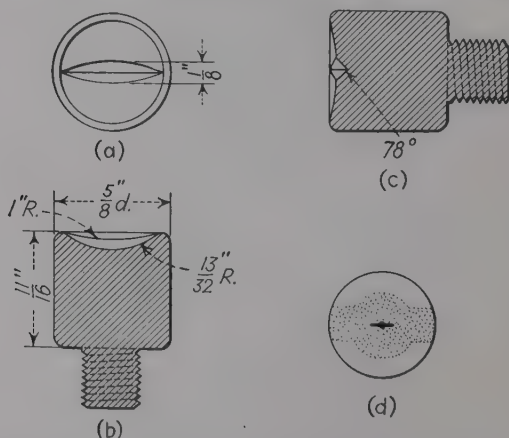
(a) Top view of a gas-type tube cathode yielding a linear focal spot. The line appears at right angles to the transverse cut. (b) and (c) Cross sections through this cathode tip. (d) A drawing from a used target showing the observed shape of the focal spot (in black). This spot is surrounded by a zone of discoloration (pebbled) which emits weak radiation. (Corey, Wyckoff, and Lagsdin.)
